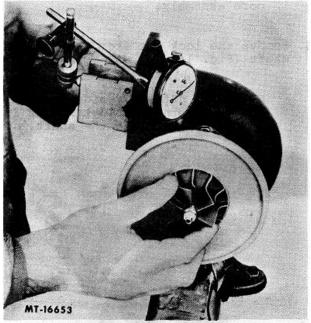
Checking Radial Shaft Movement with Compressor Housing Removed
